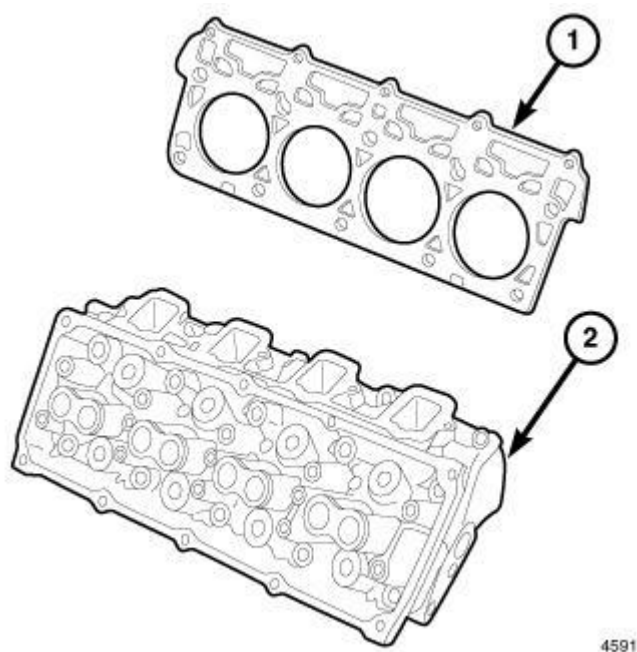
5.7L/6.1L CYLINDER HEAD COMPONENTS
